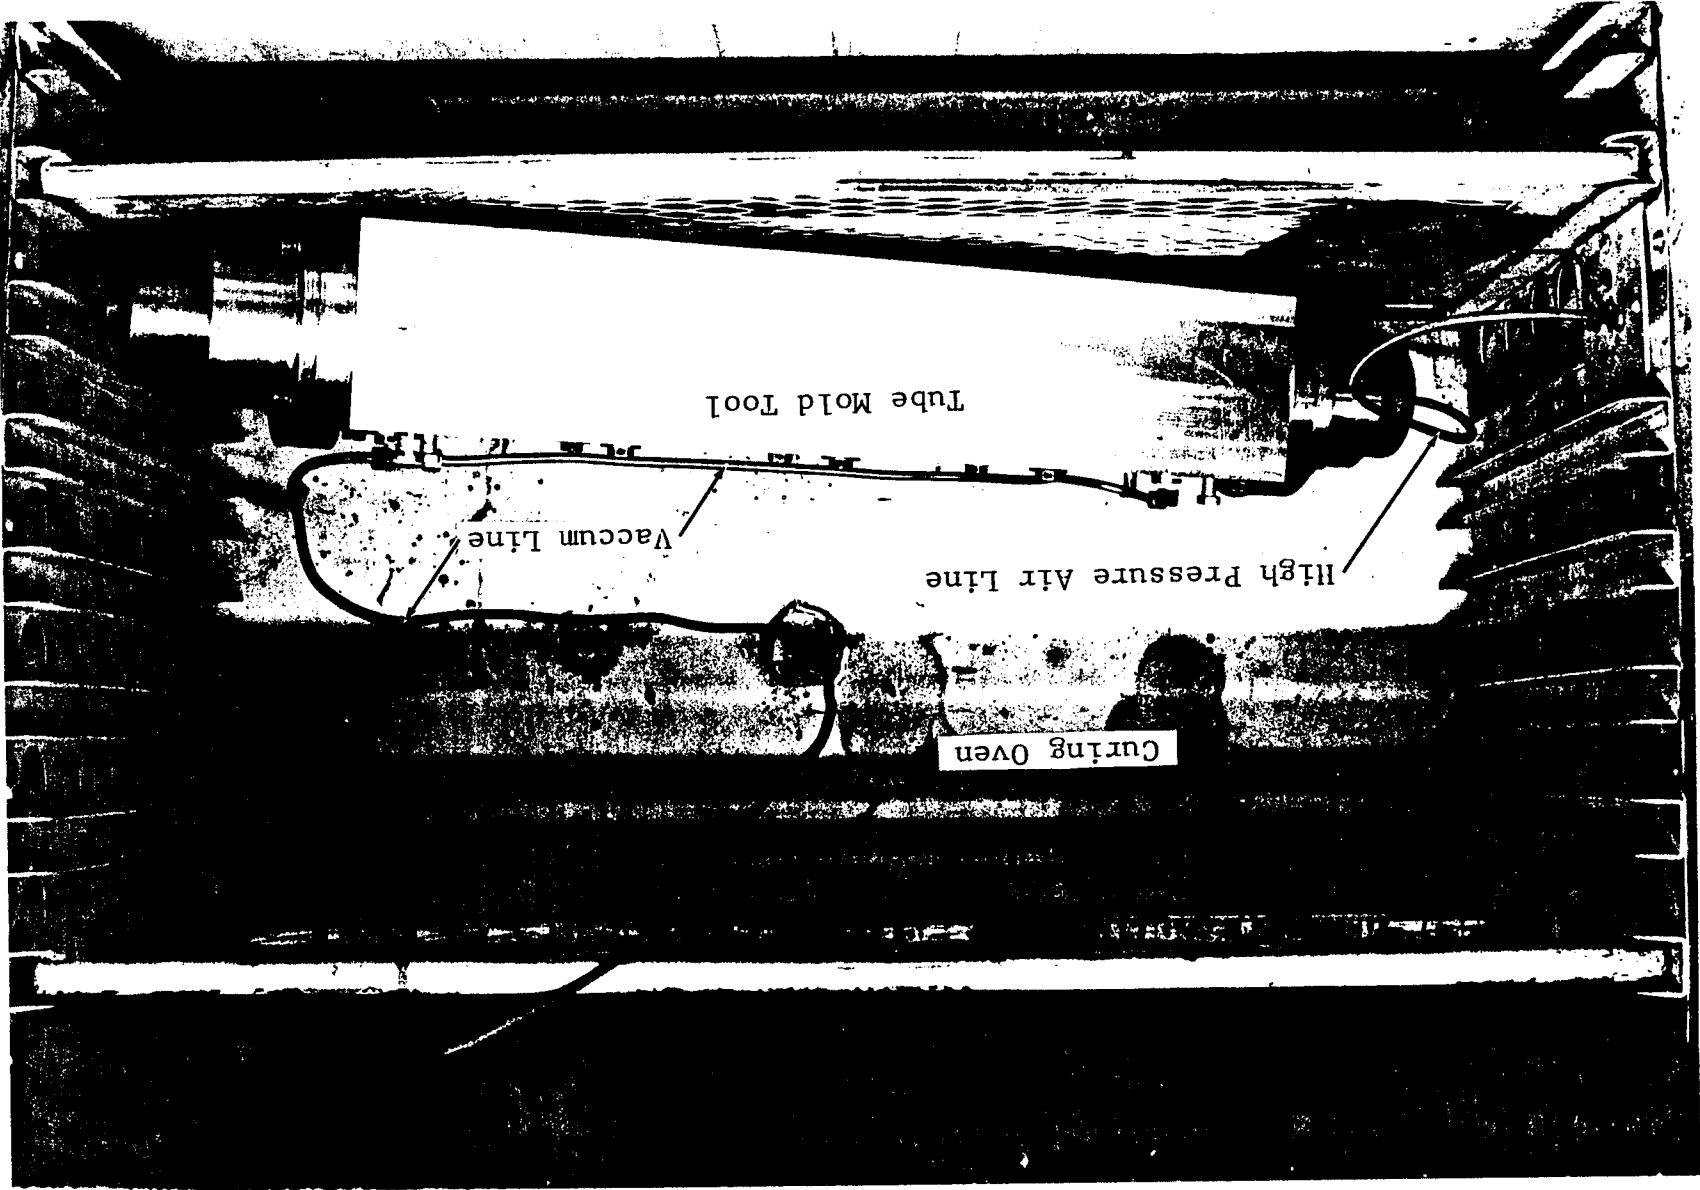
Assembled cavity mold tool for composite tube fabrication shown in curing oven with air and vacuum lines attached.
